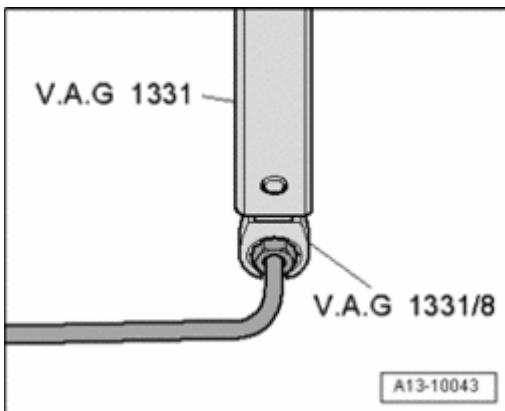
Fastening High-Pressure Line At Fuel Rail Using Torque Wrench V.A.G 1331 With Open End Wrench Socket V.A.G 1331/8
